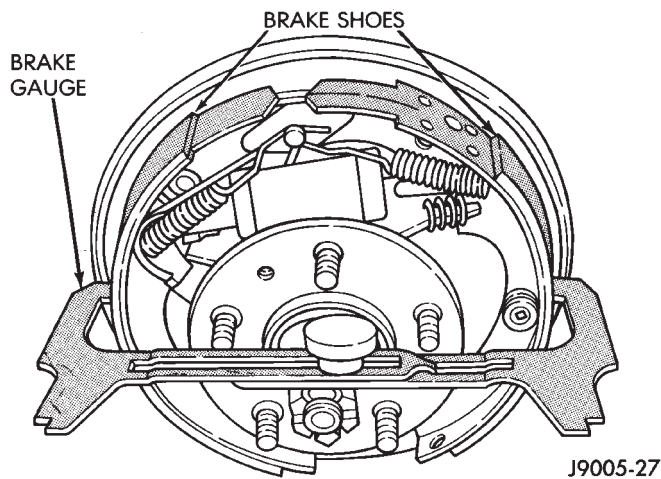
Adjusting Brakeshoes To Brake Gauge
